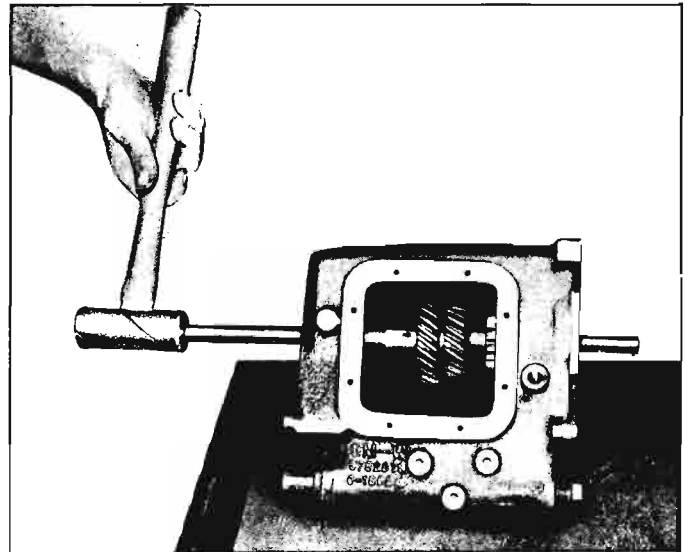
D-36—Removing Countergear Shaft with Dummy Shaft
